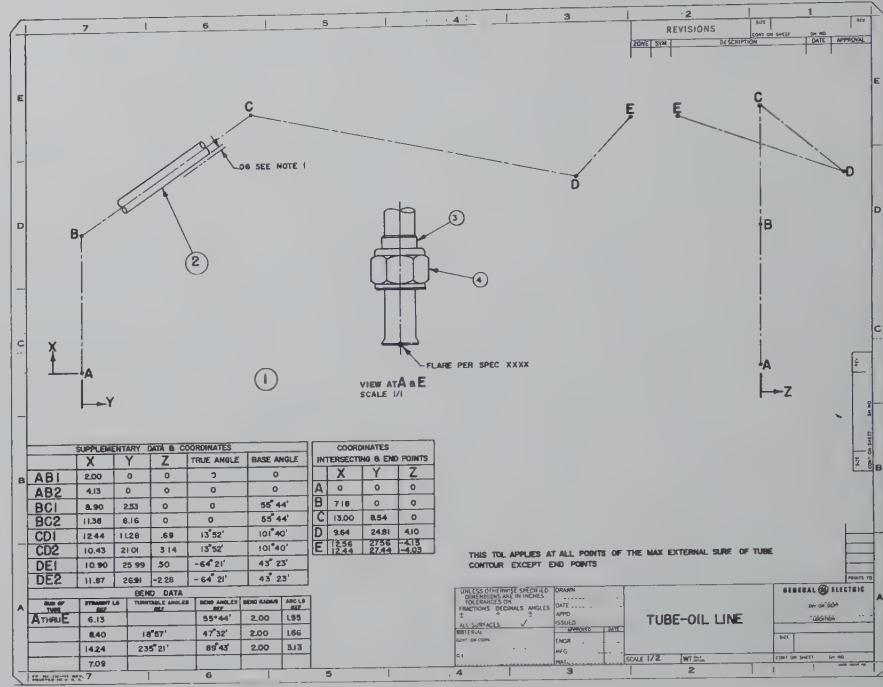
DETAIL DRAWING OF TUBE (NEW METHOD)
